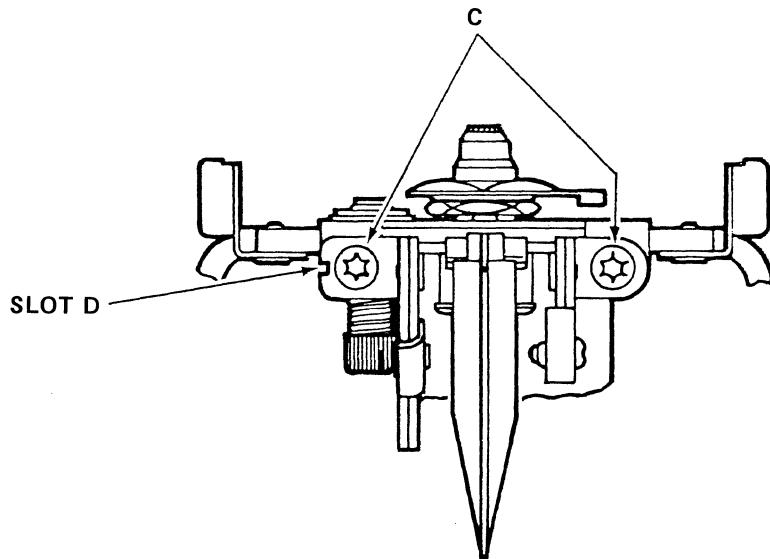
PRINT HAMMER SIDE-TO-SIDE ADJUSTMENT
